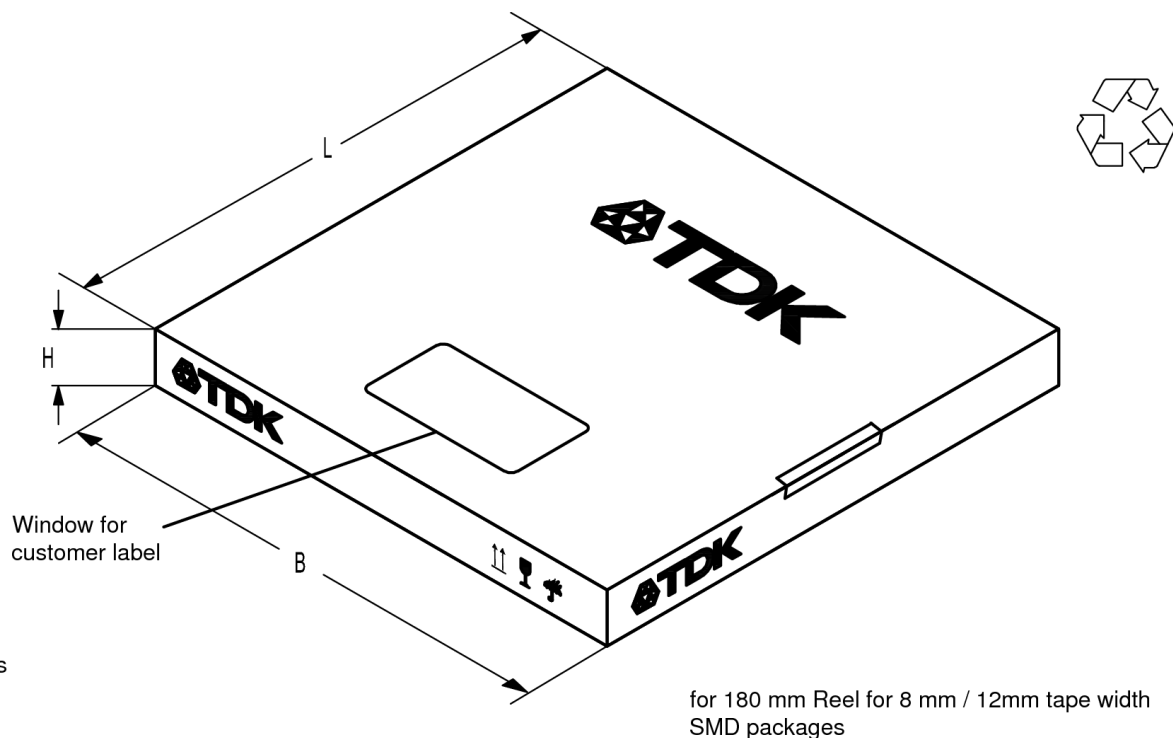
Drawing of folding box for reel with diameter of 180 mm.
